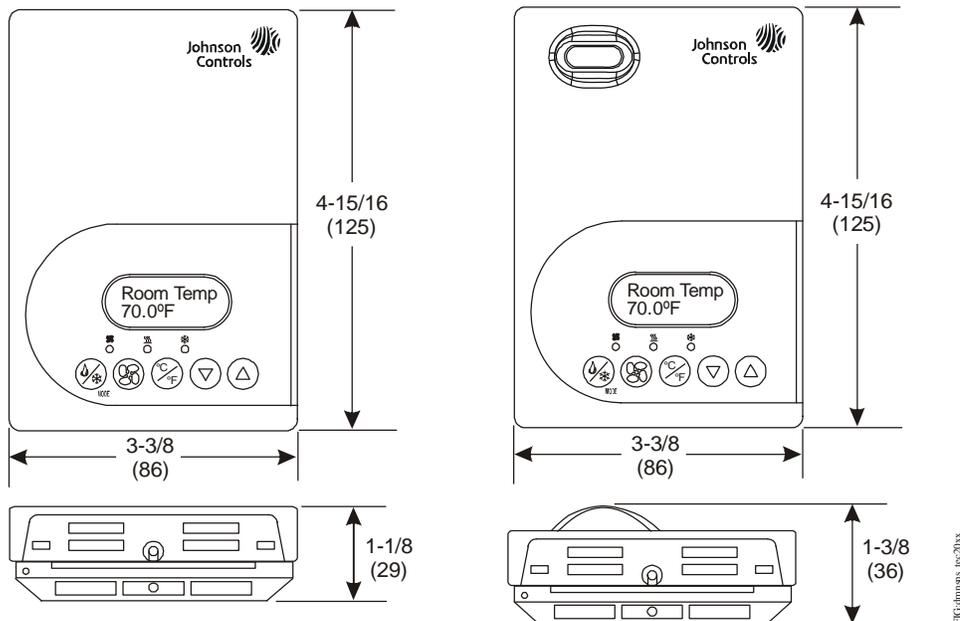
TEC20xx-4 and TEC20xx-4+PIR Series Thermostat Controllers Dimensions, in. (mm)
